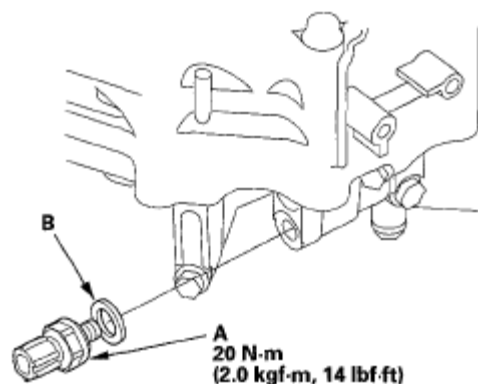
Identifying 2nd Clutch Transmission Fluid-Pressure Switch And Sealing Washer With Torque Specificaiton
